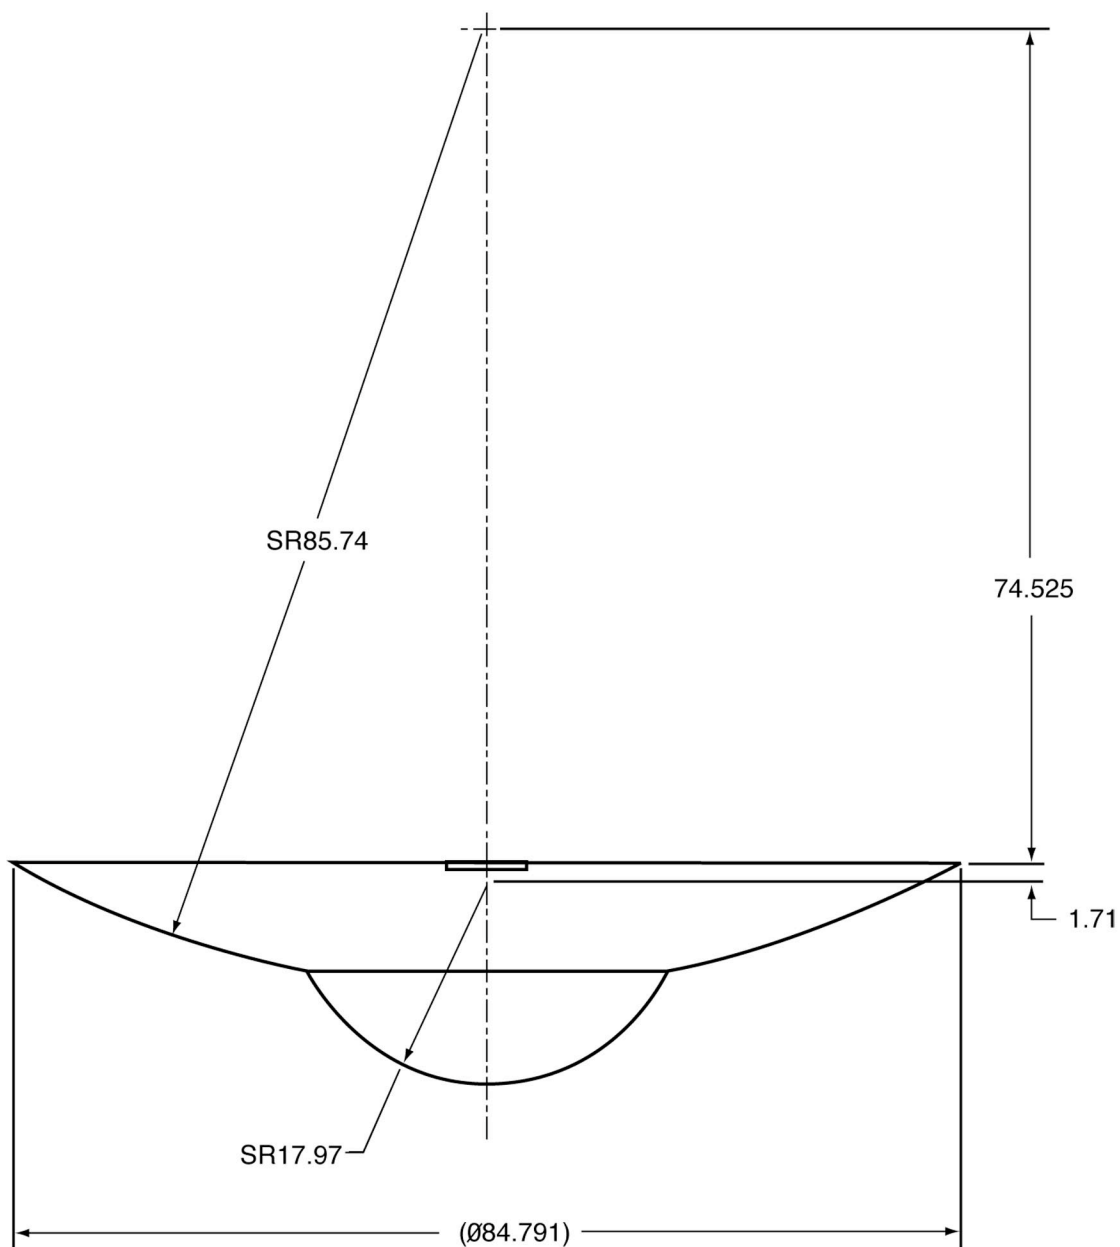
Dimensioned drawing of the 2021E PT7 shadowplate; the front surface of the shadowplate is defined as the top surface in this drawing
